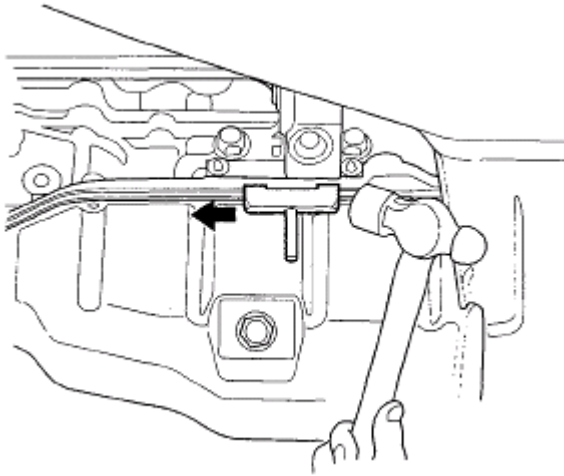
Cutting Oil Pan Seal By Striking Side Of Cutter
